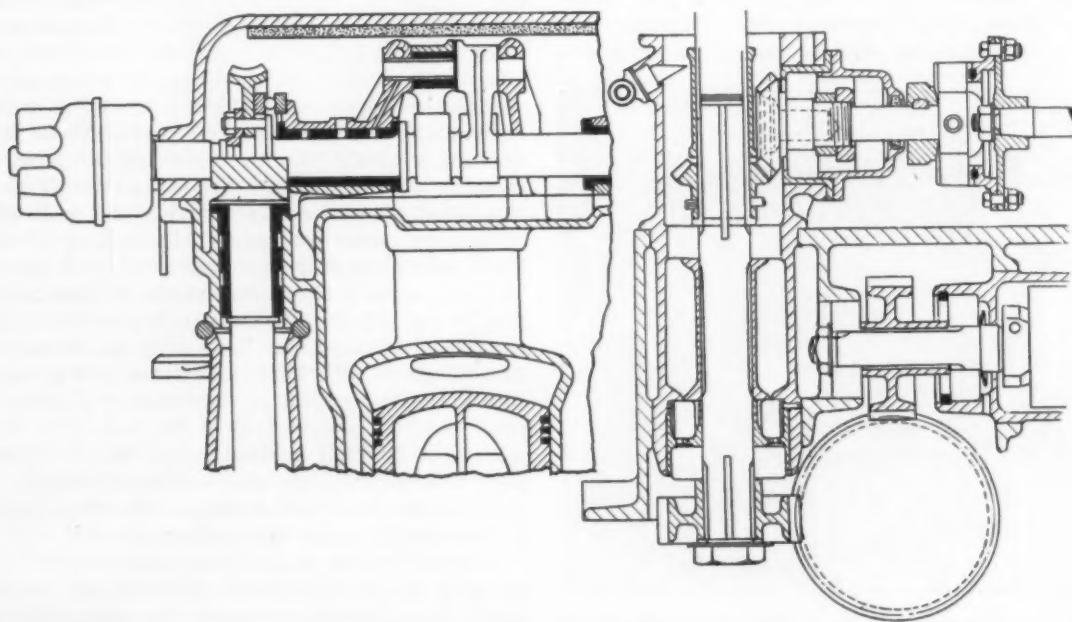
CAMSHAFT DRIVE OF LANCHESTER ENGINE
